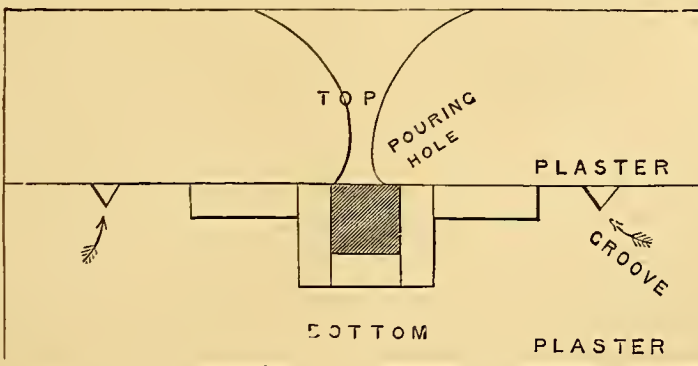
TRANSVERSE SECTION OF MOULD WHEN COMPLETED.
